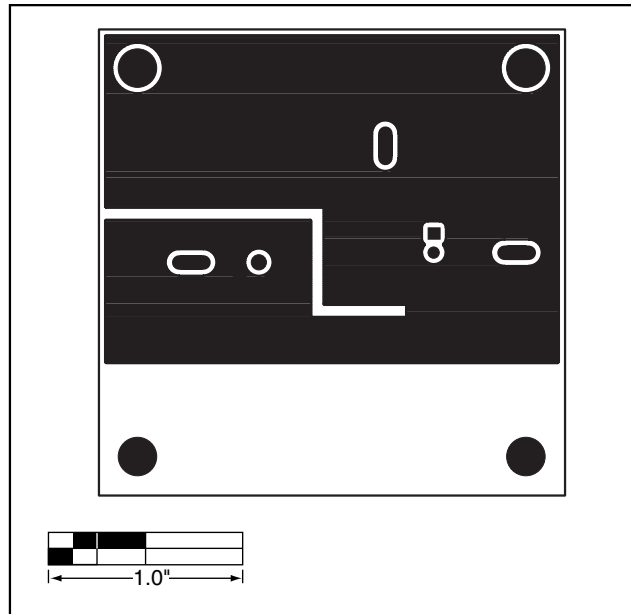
MAX5026 EV Kit PC Board Layout—Solder Side
